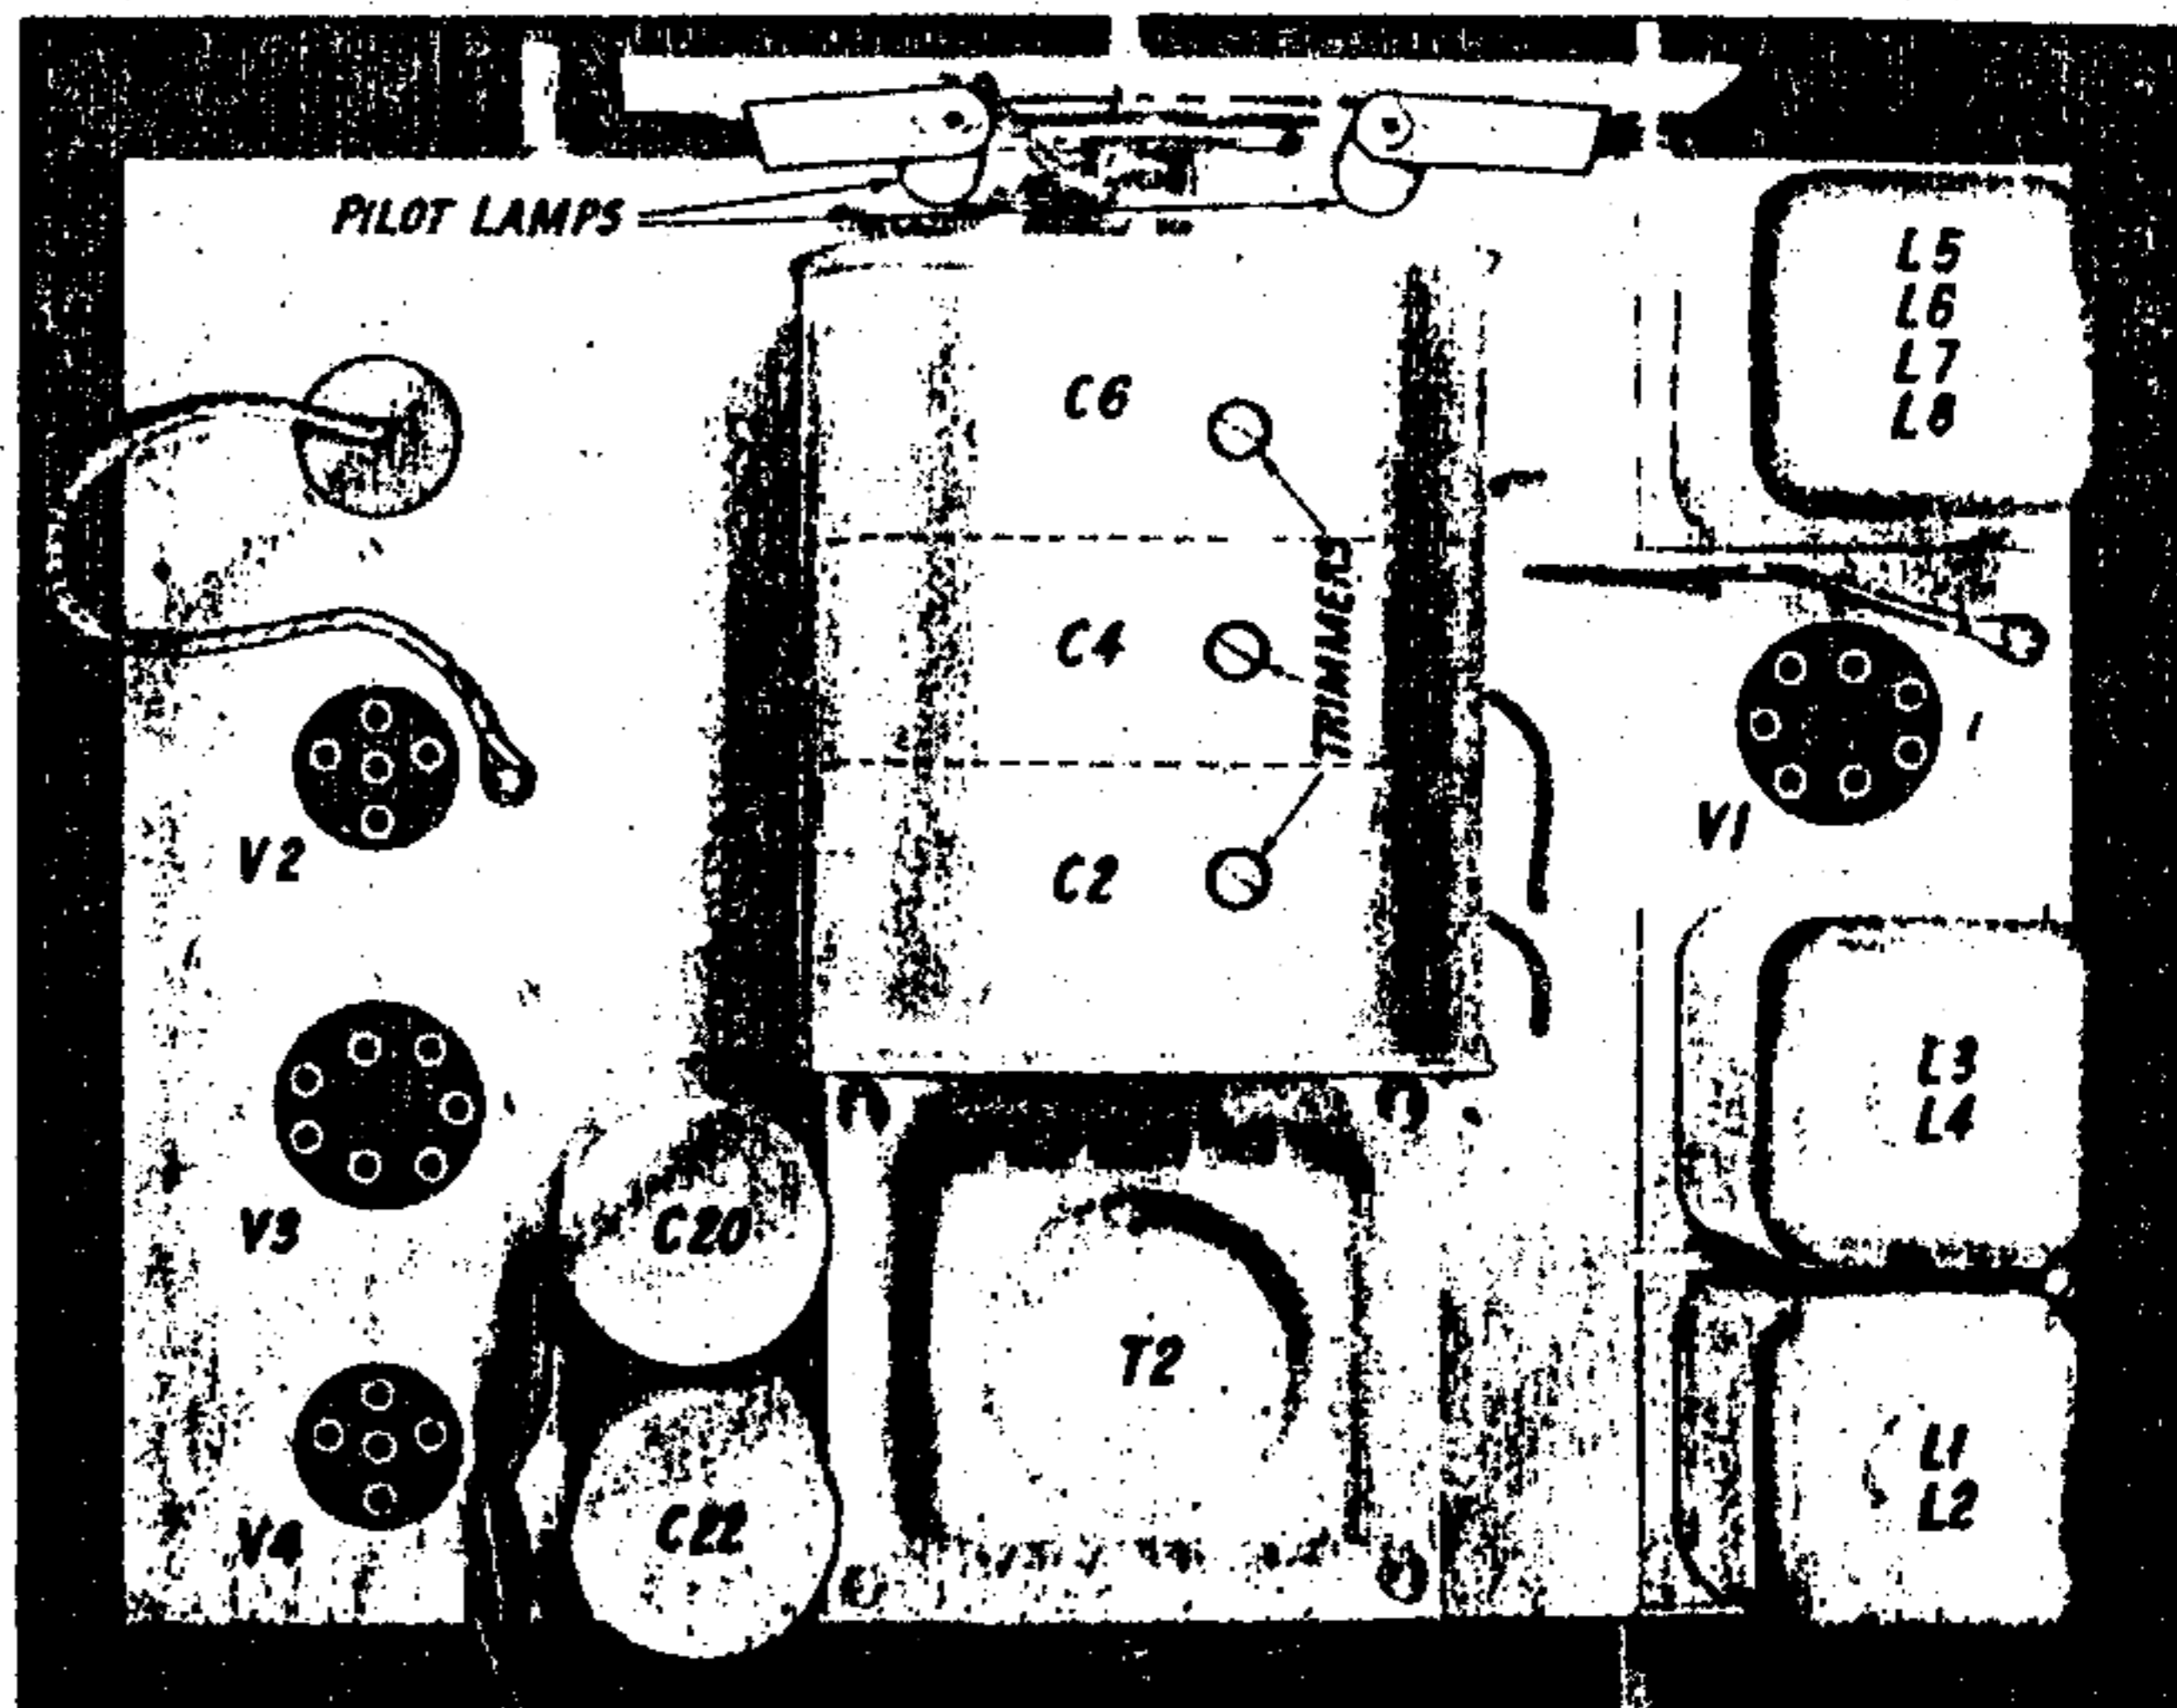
Plan view of the chassis. The valves have been removed. Note the tuning condenser trimmers, which are easily accessible.
